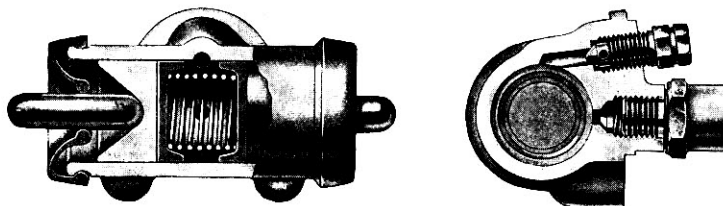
Wheel cylinder details. The conical-ended bleeding screw and plug is clearly shown at the top of the right-hand illustration.
